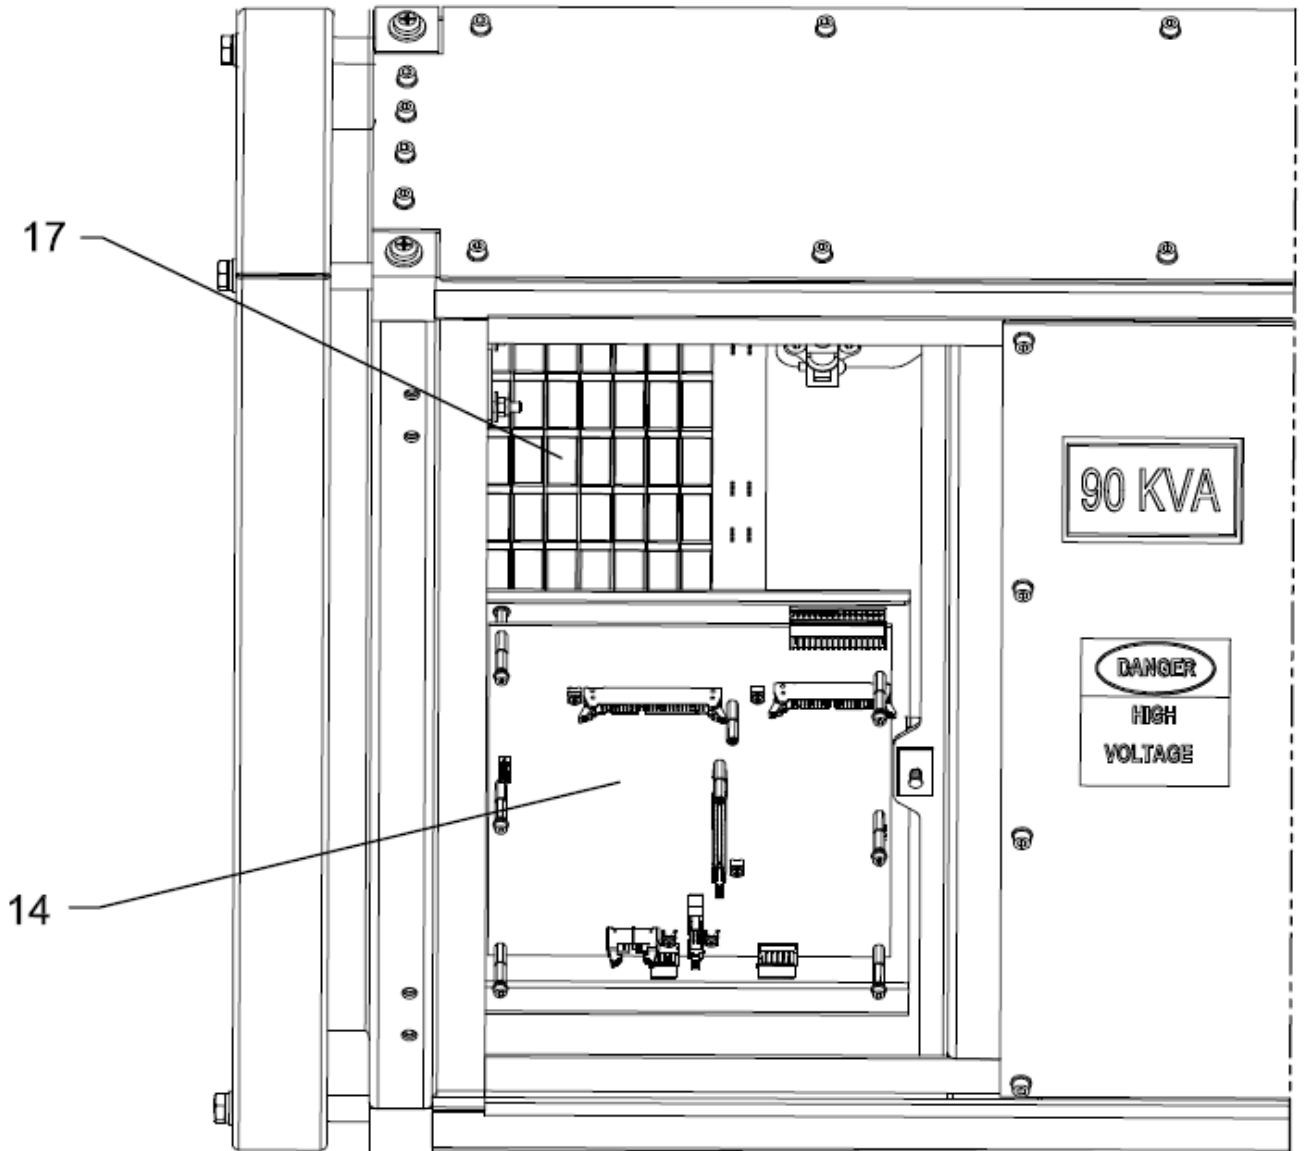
2500+ GPU Illustrated Parts List Control Board and Filter Board
